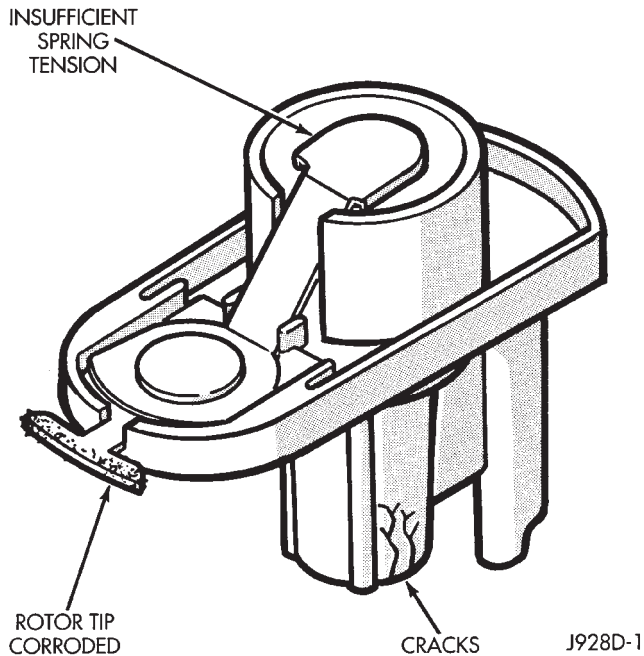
Rotor Inspection—4.0L Engine—Typical
